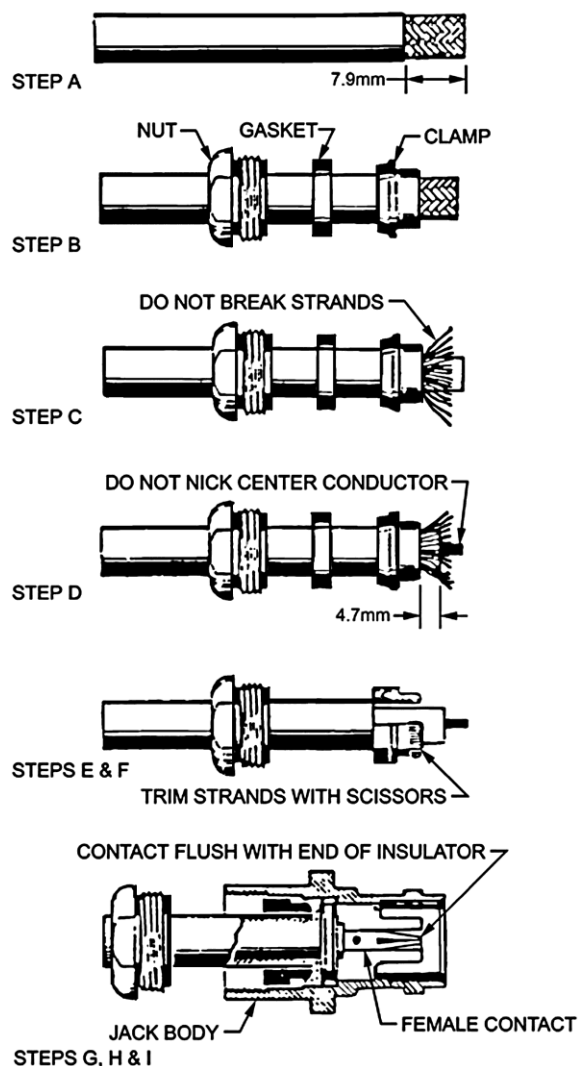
Attaching Improved BNC Connectors to Coaxial Cable
